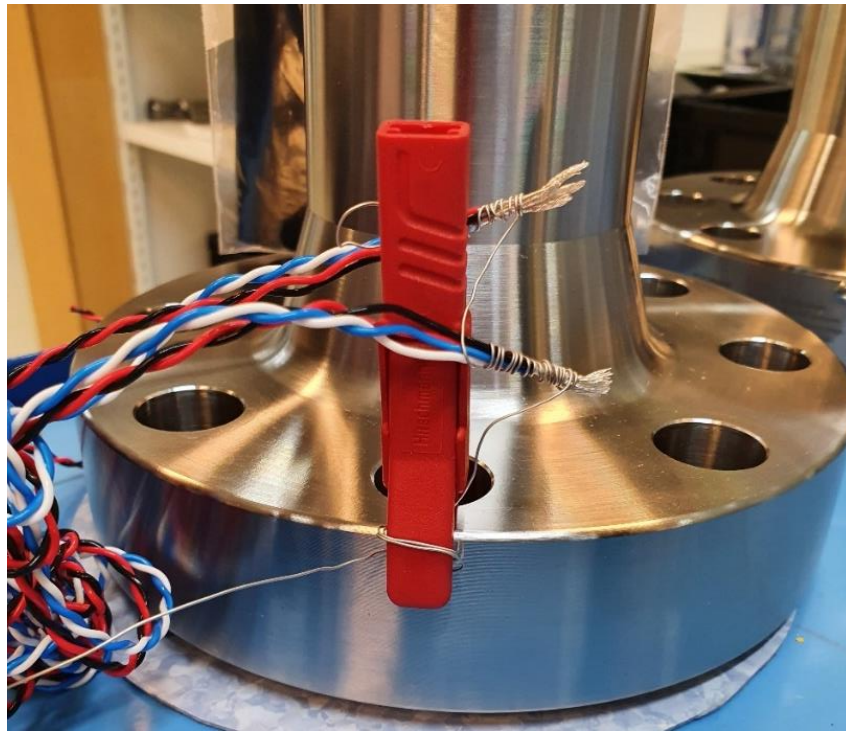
Example of how to ensure flying lead contact with steel part of sensor. Steel wire clamped to flange.
